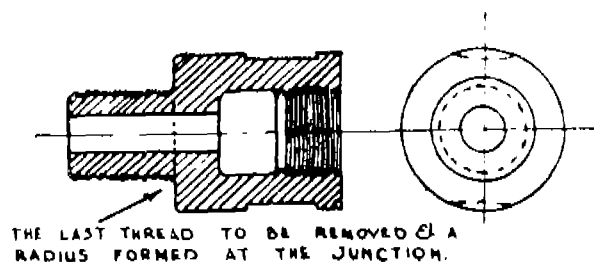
TYPICAL MILD STEEL DISTANCE PIECE FOR MOUNTINGS.
